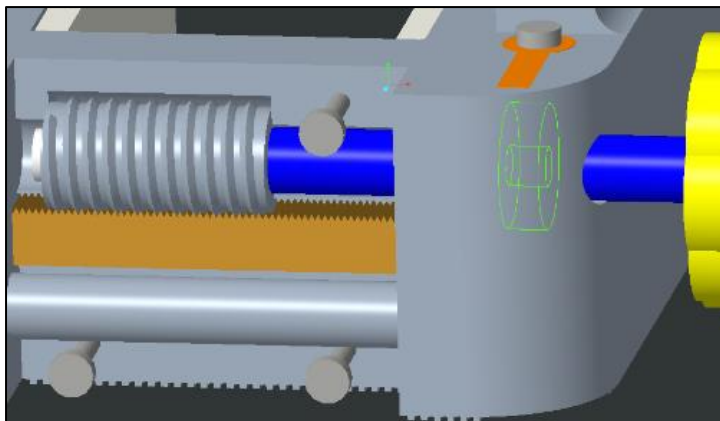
Shows the worm gear, rod (in blue), bearing (highlighted in green) and rack (in orange) – all with the back panel removed.
